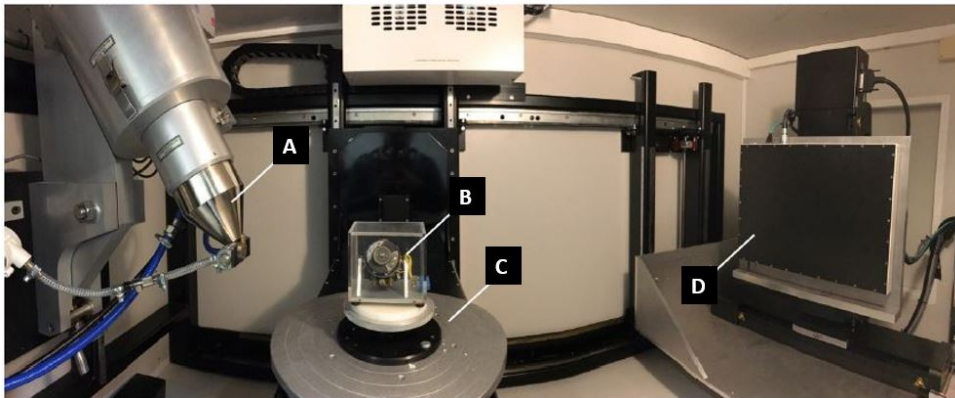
CT industrial measurement setup. A) X-ray tube, B) Part under test, C) Object manipulator, D) Flat panel detector.
